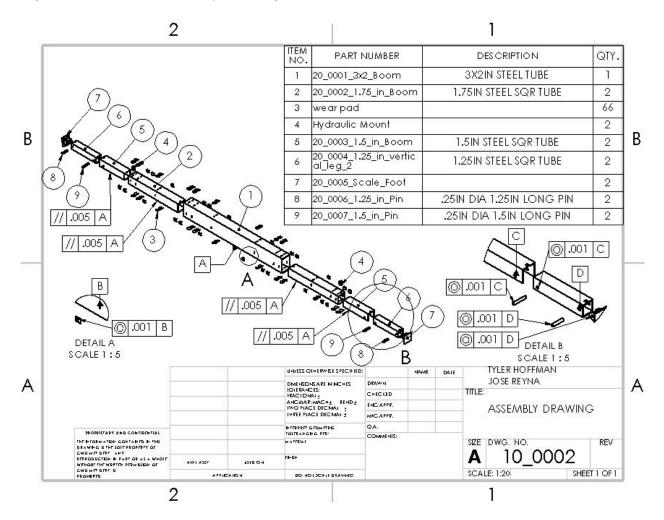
10\_0002 Assembly Drawing Revision 2
